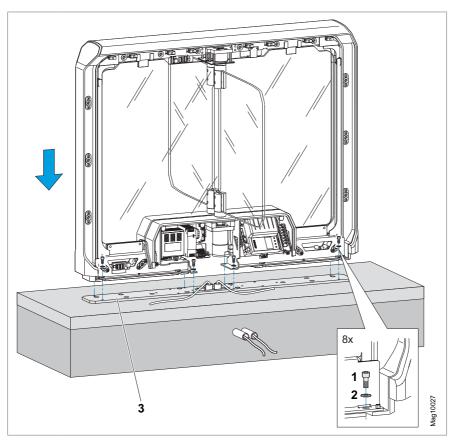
Mounting version "gluing plate mounting" – Mounting the pedestrian gate
